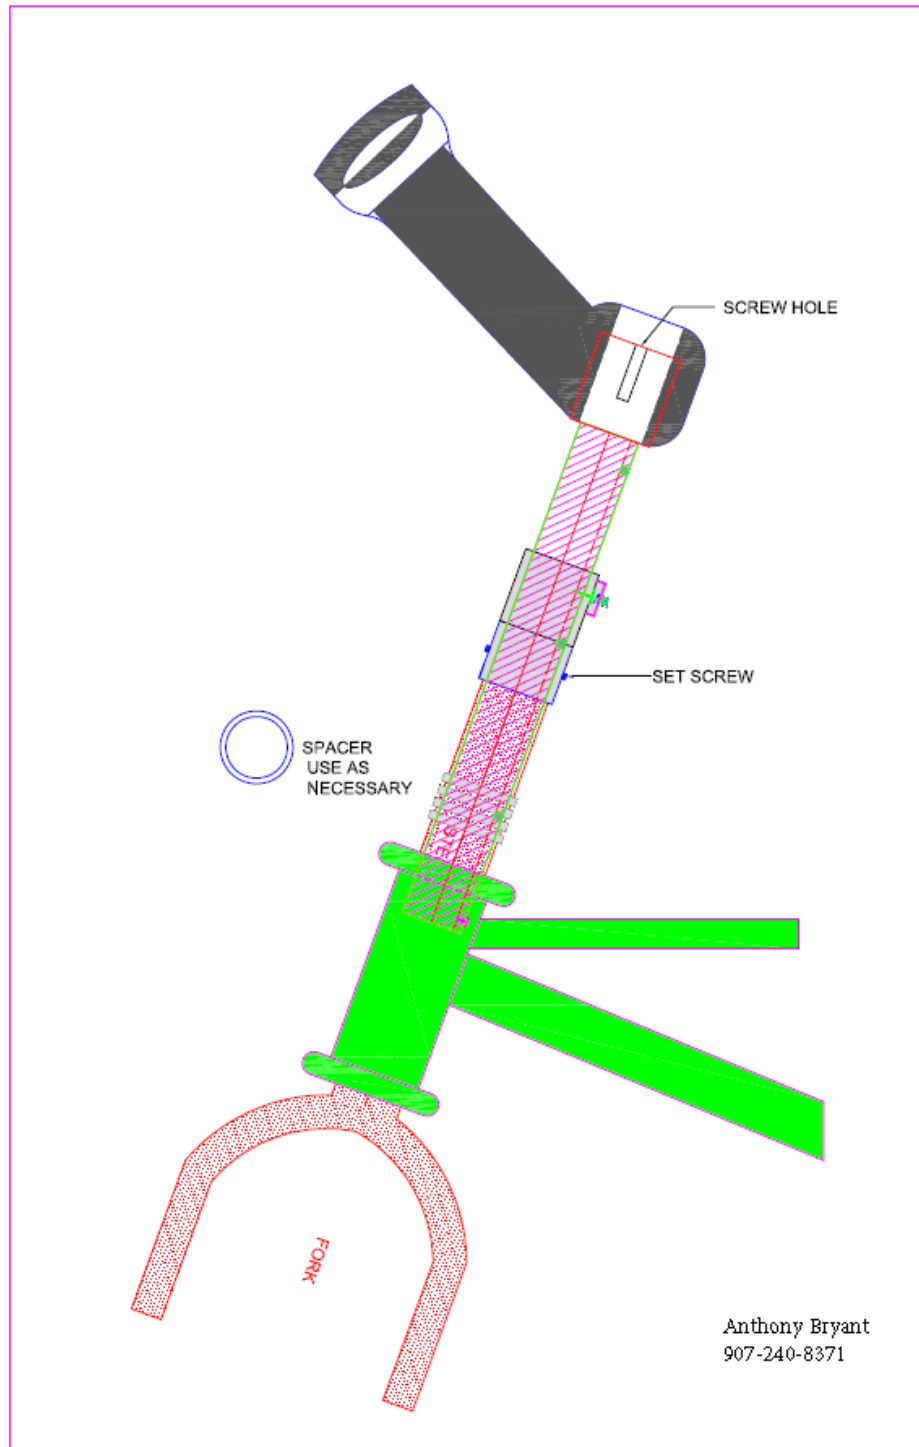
Prototype Clamp Assembly Mounted to Bicycle
